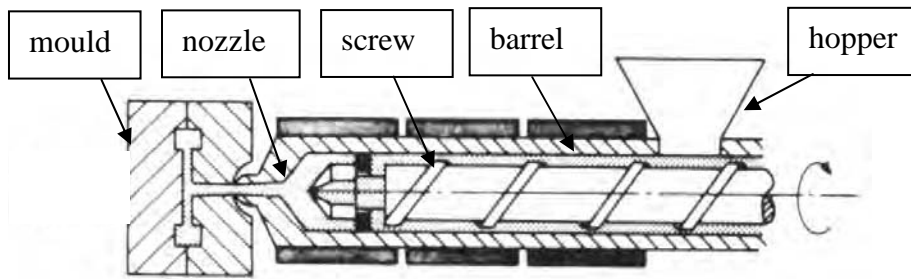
Schematic of an injection moulding machine (Crawford, 1987).
